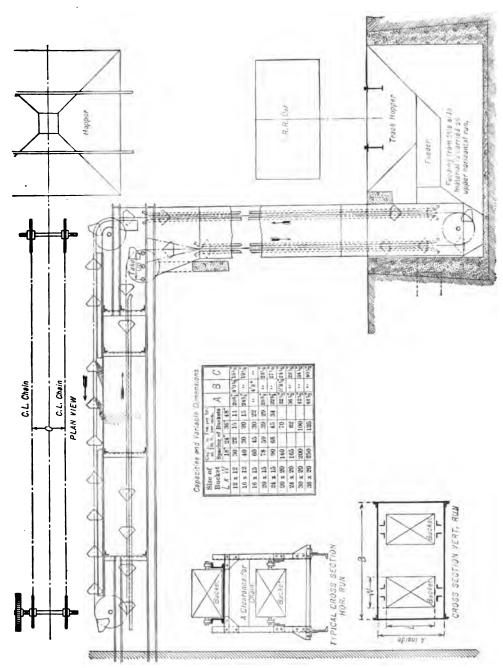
GRAVITT DISCHARGE ELEVATOR-CONVEYOR. (Link Belt Co.)
